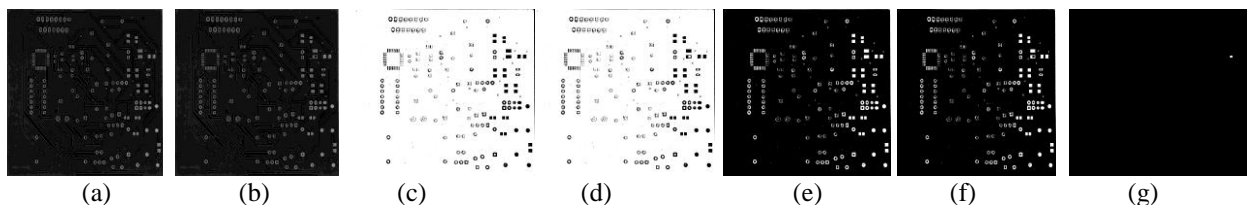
Output of Pad Damage Defect Detection-(a) and (b) are the R channel of Reference PCB image and Test PCB image with pad damage defect,(c) and (d) are binary image of R channel Reference and Test PCB images, (e) and (f) are the inverted image of Reference and Test PCB binary image, (g) Pad Damage defect
